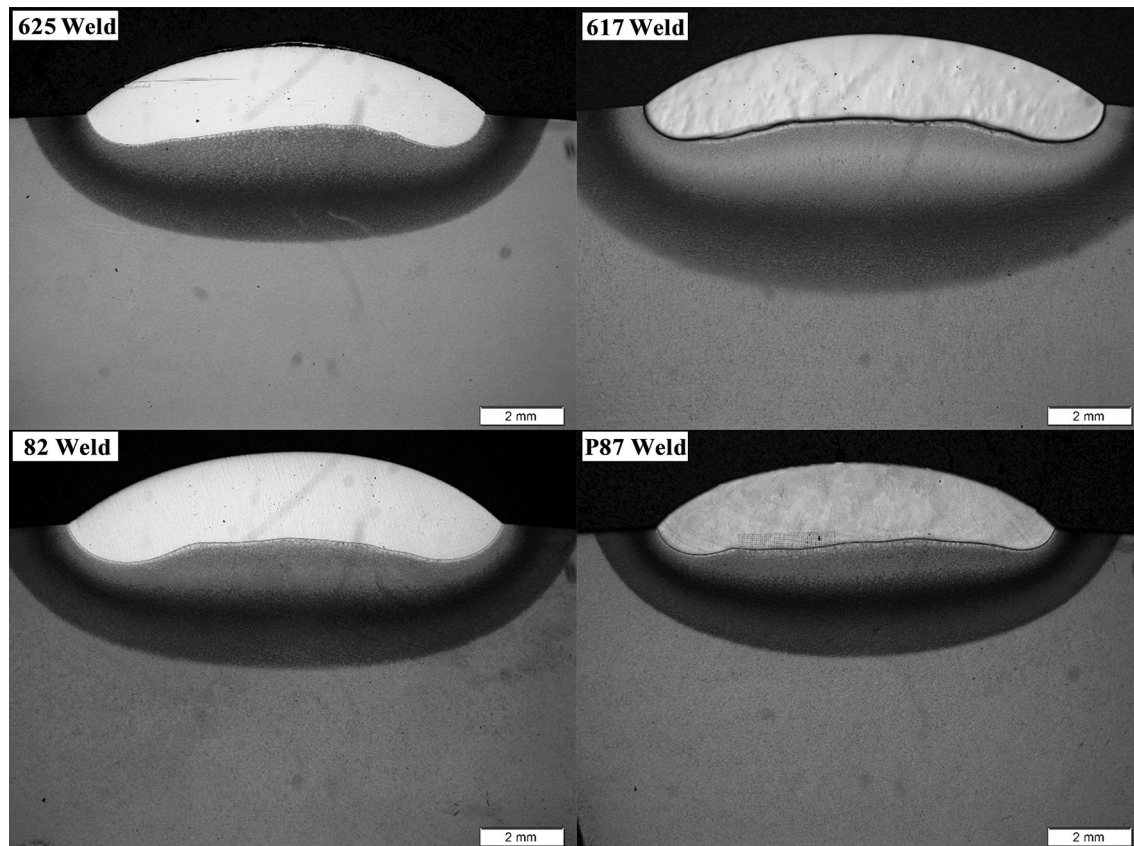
Macrographs showing the weld bead profiles for the DMWs.
